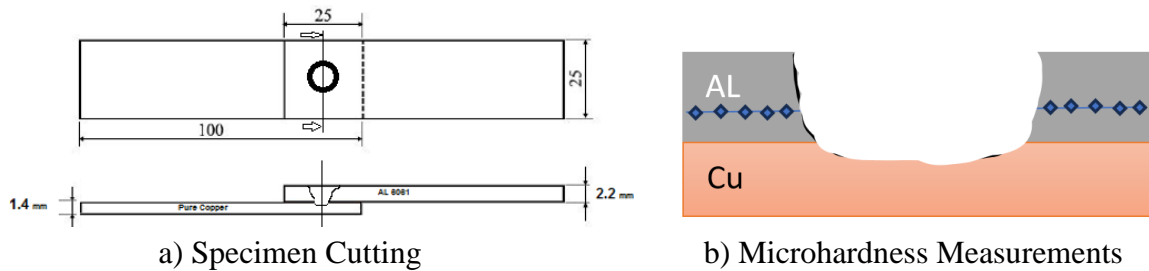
The preparation and the measurement of microhardness weld specimen
